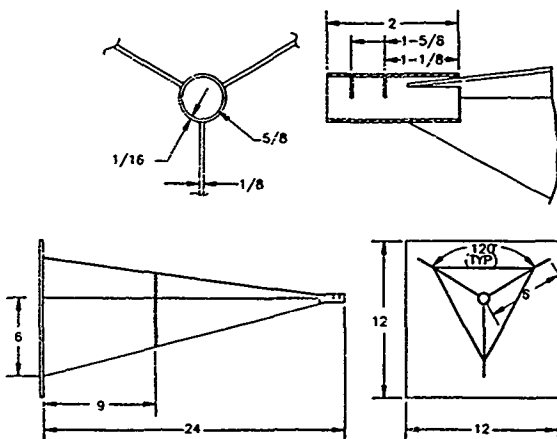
Sketch of FSP gage mount used at West Coast Shock Facility.
